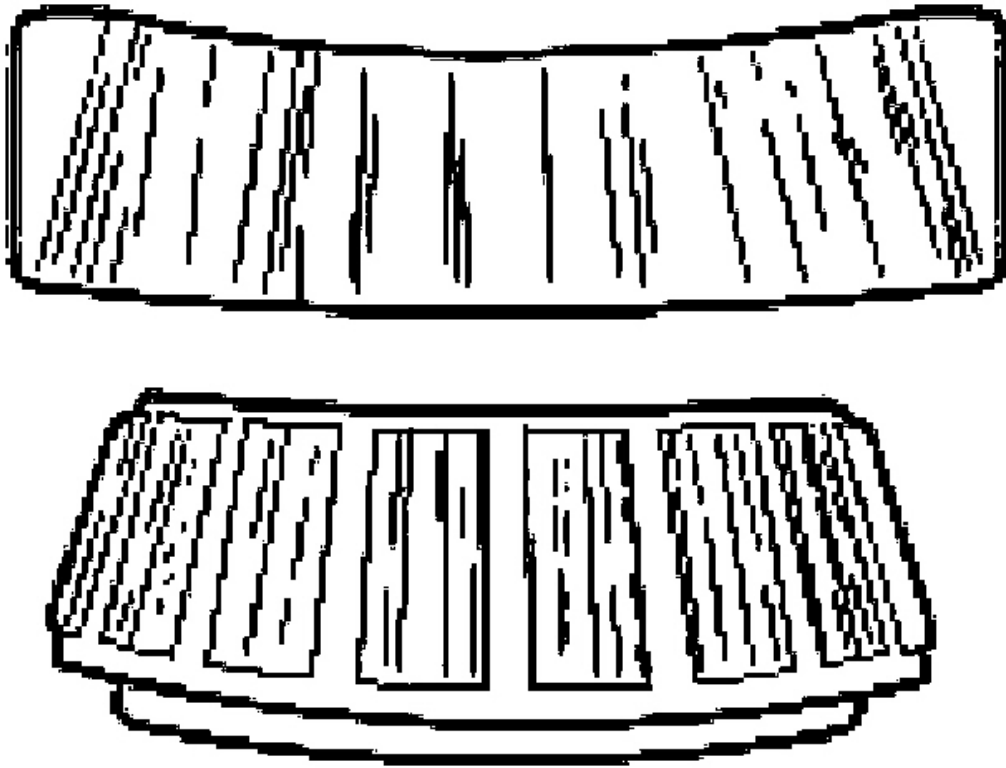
Checking Taper Rollers (Worn Away) Ends
